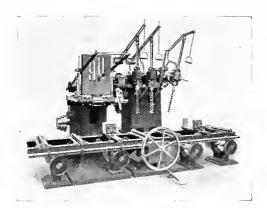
No. 505. Combined Medium Range Car Gainer and Vertical Boring Machine.
